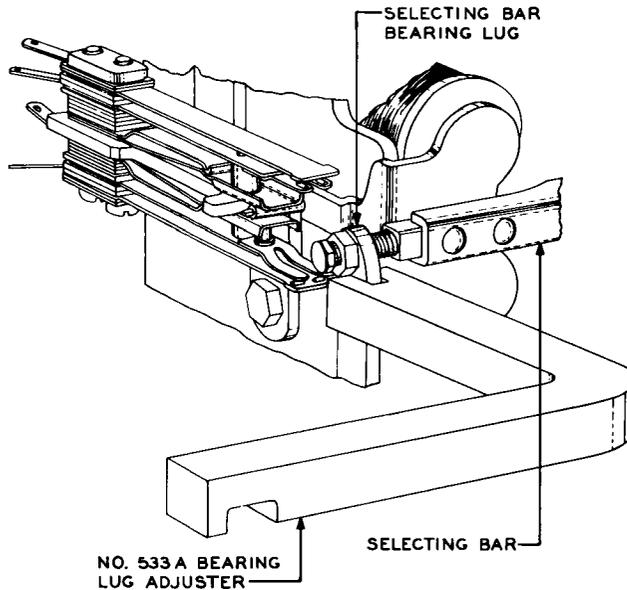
Fig. U —Method of Adjusting Selecting Bar Bearing Lug to Eliminate Bind
